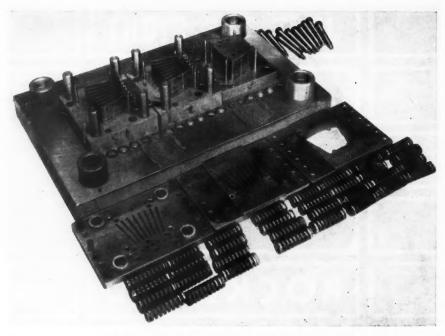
A View of the Punch Holder and Some of the Many Parts Used in the Die Assembly
